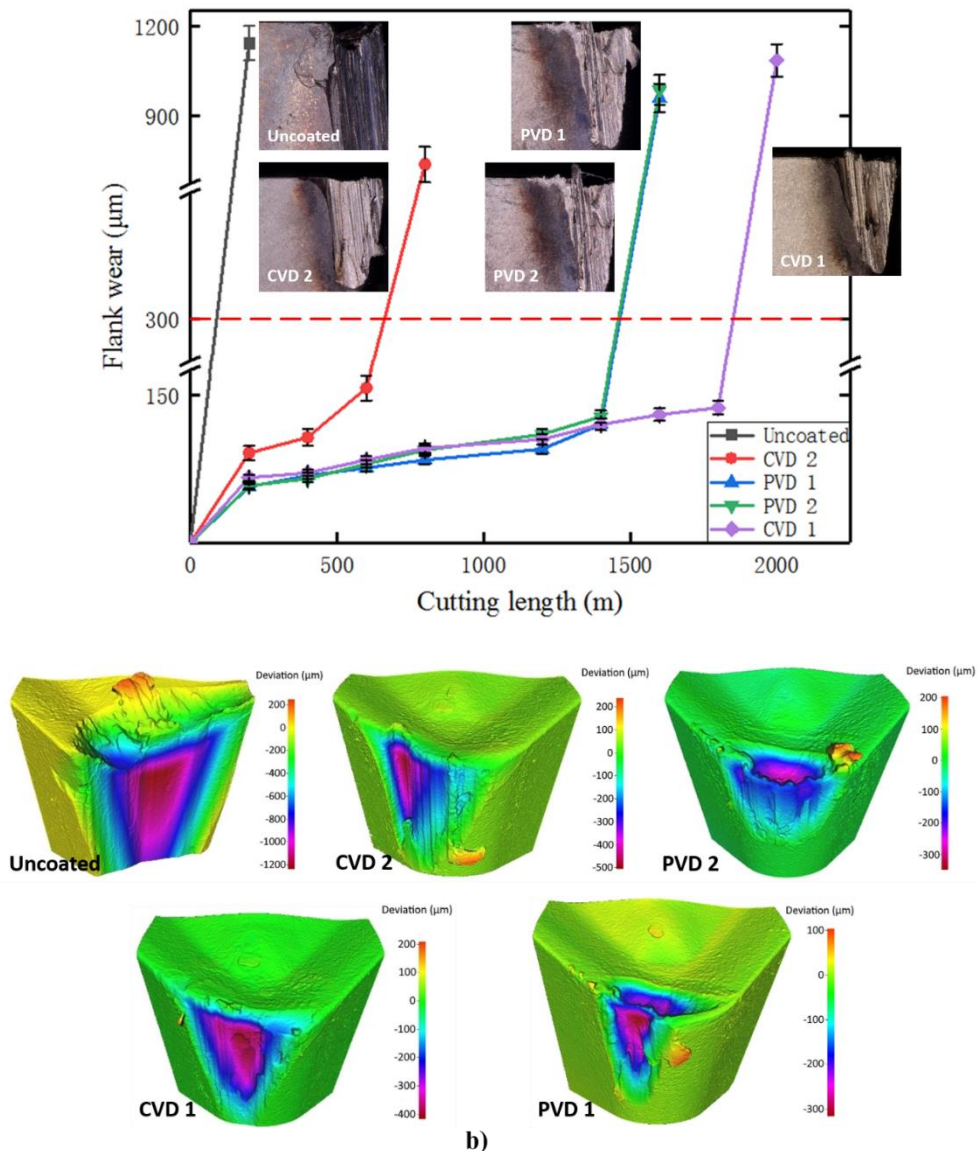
Cutting tests results: a) Flank wear versus Cutting length and b) Wear Alicona images of the inserts at the end of tool life during machining SS304.
